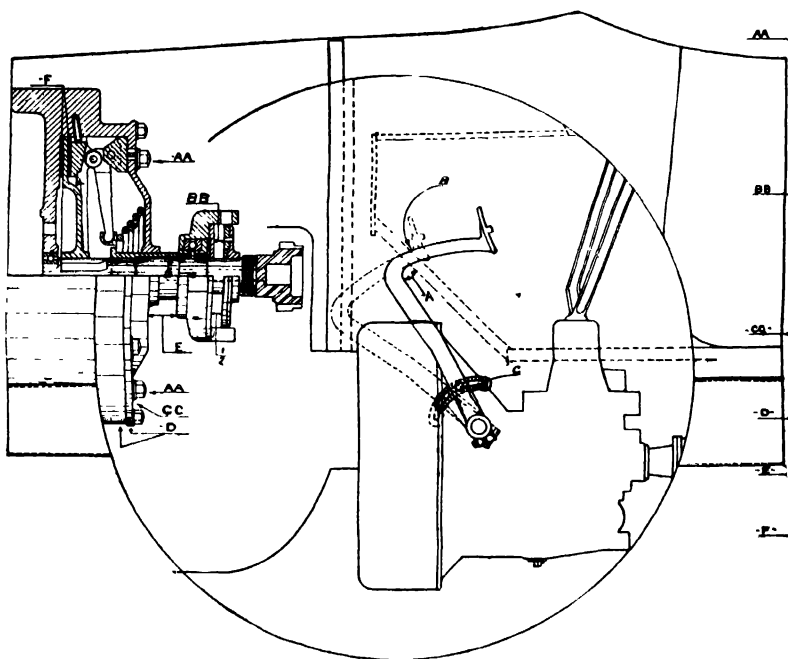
Dry-plate Clutch Pedal Adjustment.
